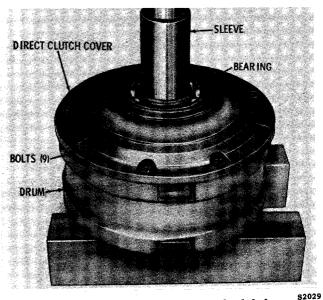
Removing direct clutch hub from bearing (VS series)
